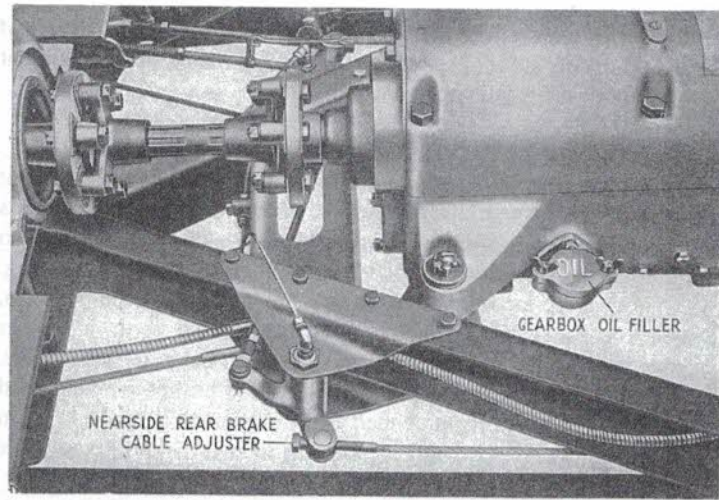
VIEW OF THE CENTRE PORTION OF THE CHASSIS. Showing the nearside rear brake cable adjuster on speed 20 model. A similar adjuster is provided on the other side for the offside rear brake.
